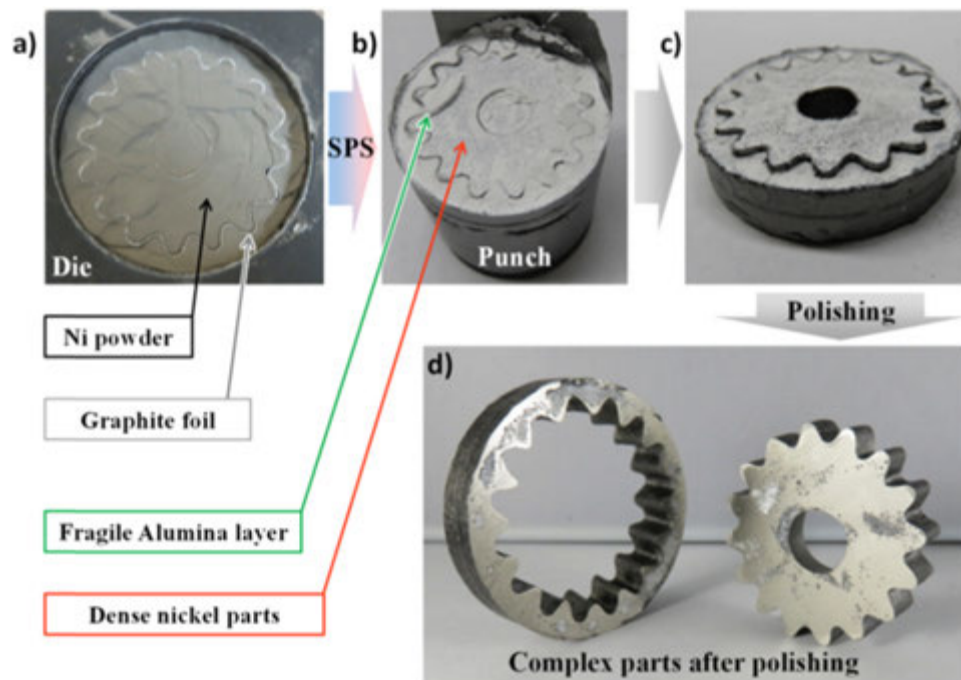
Main steps of the spark plasma sintering (SPS) process involving the ‘controllable interface’ approach. (a) loading; (b) assembly after SPS sintering; (c) releasing; and (d) final components after polishing. Reproduced from Manière, C., Torresani, E., Olevsky, E., 2019. Simultaneous spark plasma sintering of multiple complex shapes. *Materials* 12, 557.
